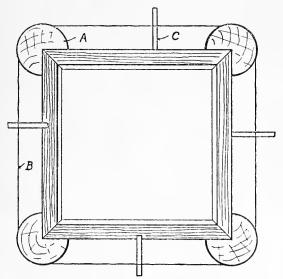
Cramping Picture Frame with Corner Blocks and Twisted String
